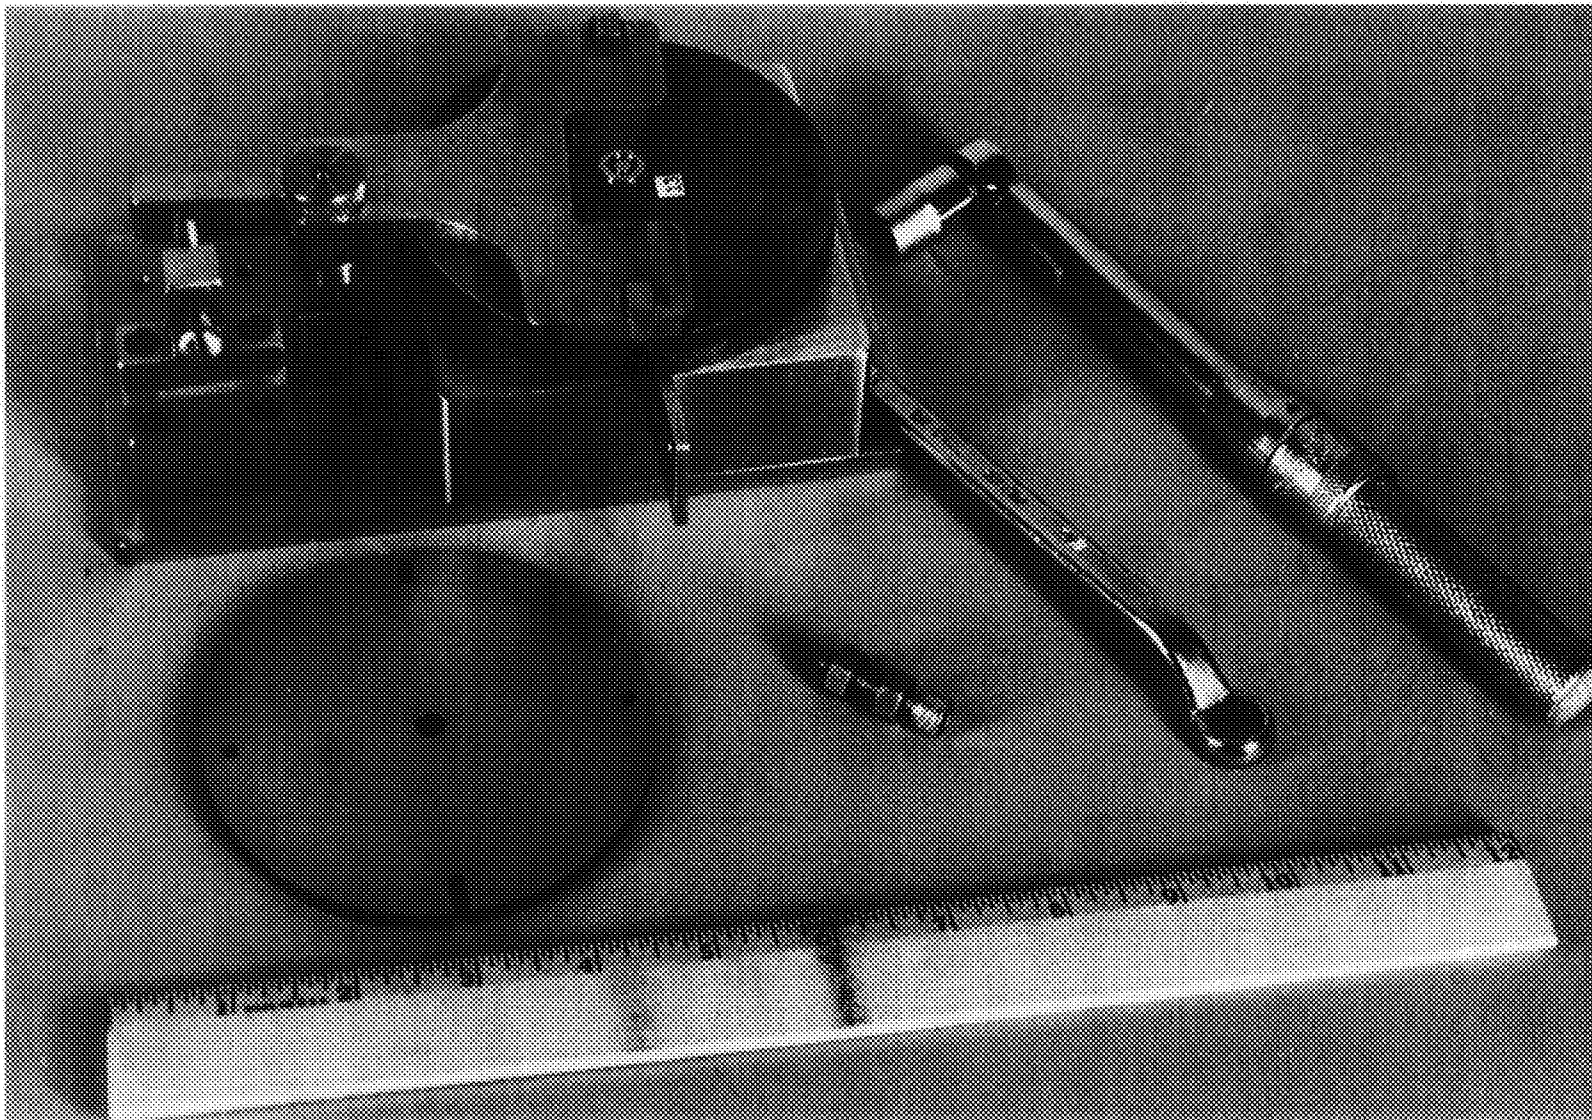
PLATE SPECIMEN, BOLT AND NUTS, FIXTURE AND TOOLS.
